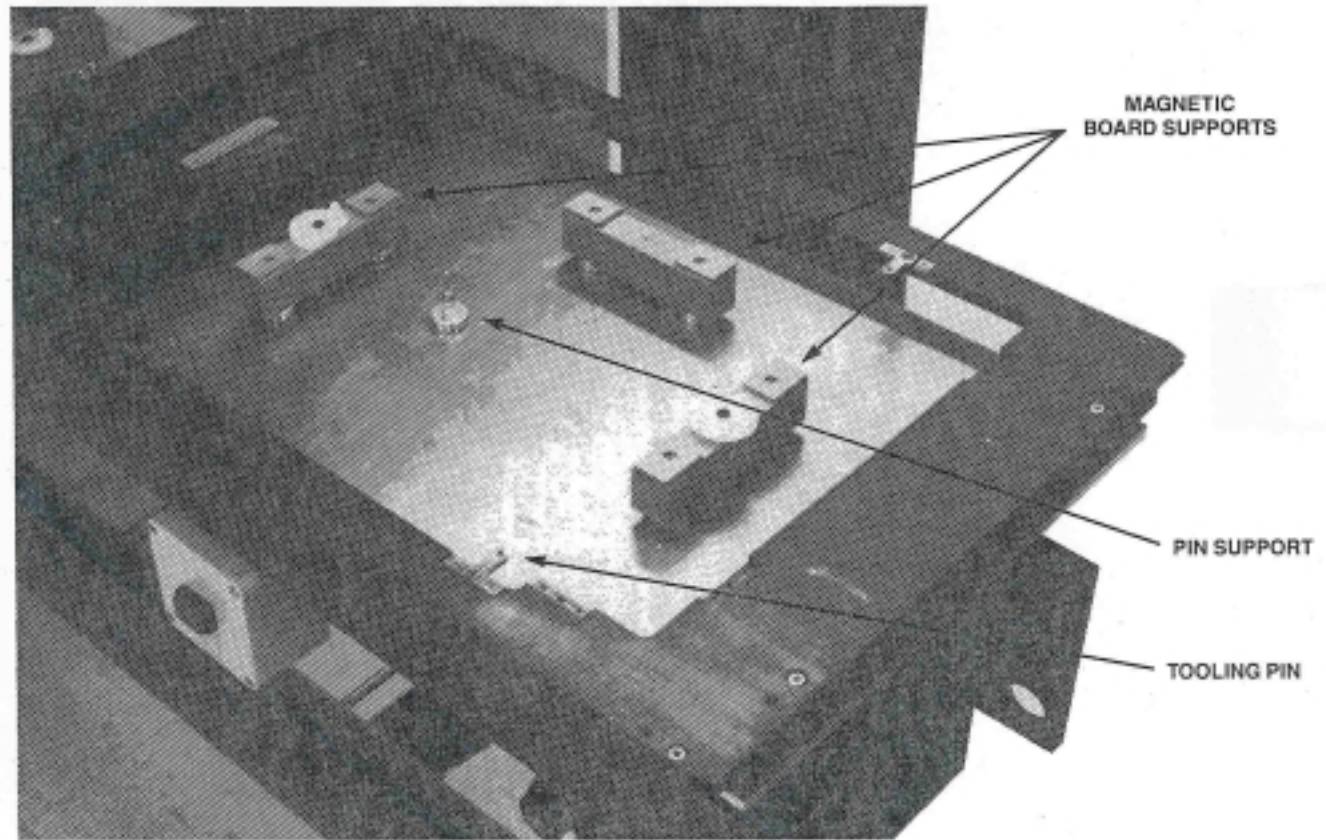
A printed circuit board holder with movable supports to accommodate different sizes of boards. (Photo courtesy of Intel Corporation.)
